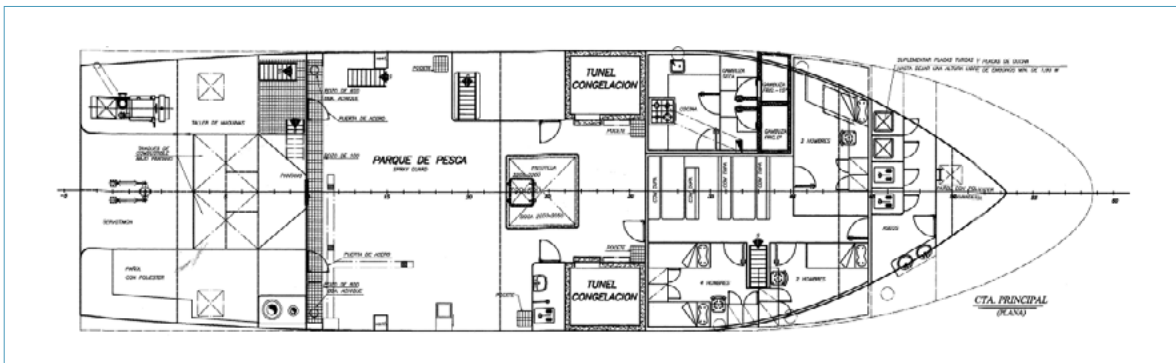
Ship plan under Spanish flag - top view (2007). (Source: Astilleros Armon VIGO S.A)
